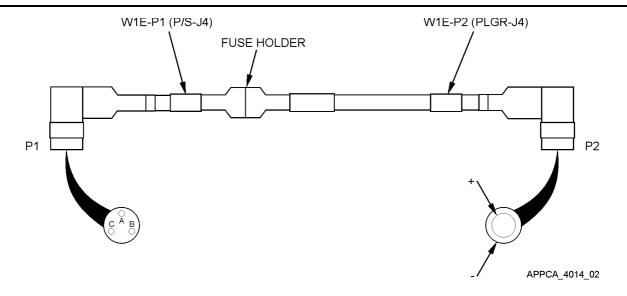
P/N 881326 W1E Cable Assembly (SICPS TENT)
